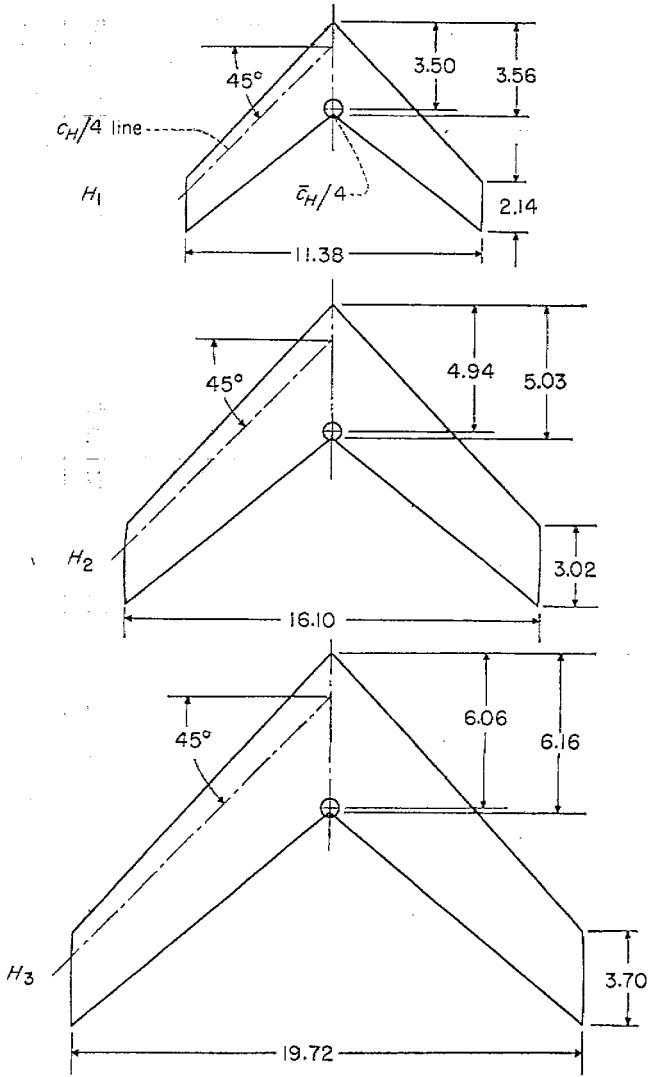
Dimensions of the horizontal tails tested. All dimensions are in inches.
